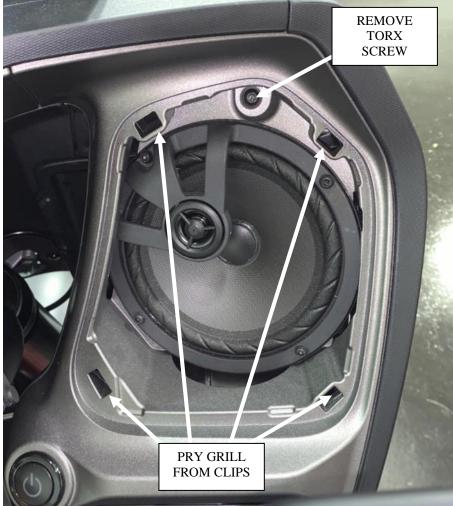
Remove the speaker grills and torx fastener (right side shown, left side similar).
